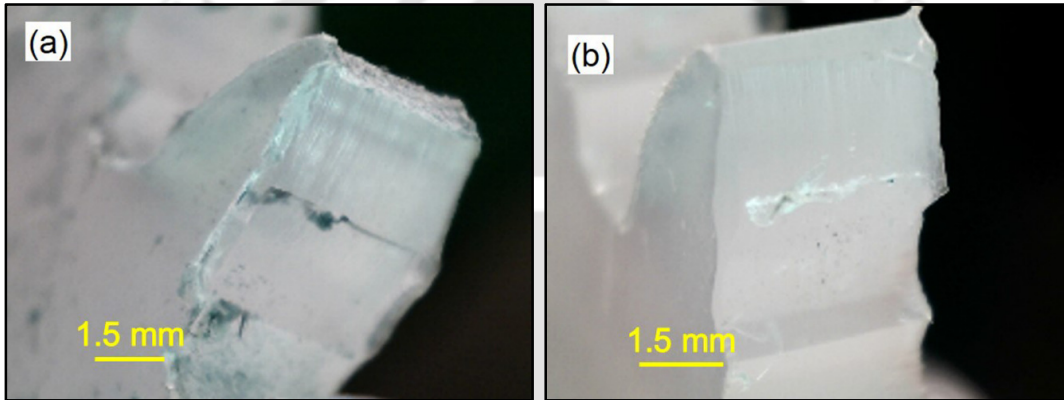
Worn out of test gear at 2.5 Nm against (a) conventional machined gear (after 7.20×10^5 cycles) and (b) WEDM gear (after 2.88×10^5 cycles)
